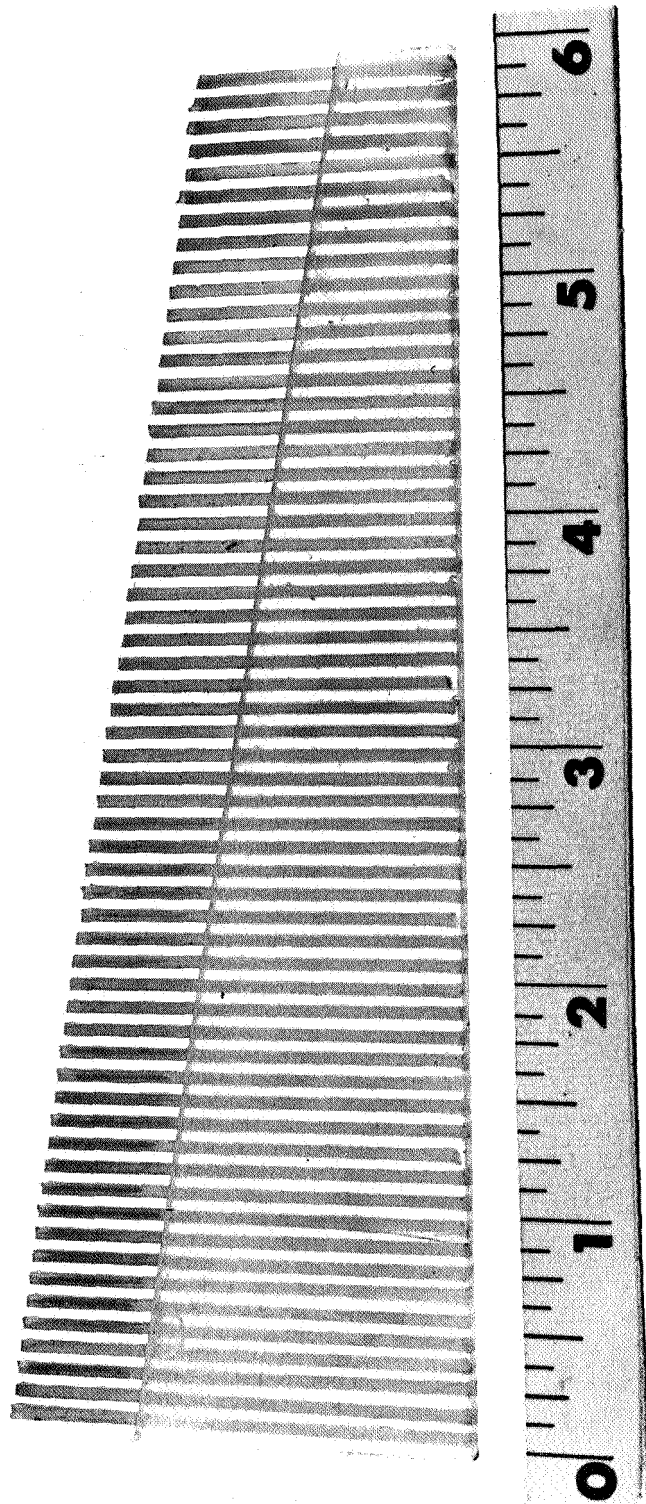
PHOTO OF FINISHED COMB FOR CONICAL PART
